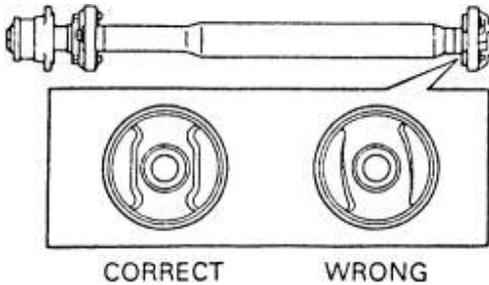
When installing, make sure the shaft is not out of shape or twisted
